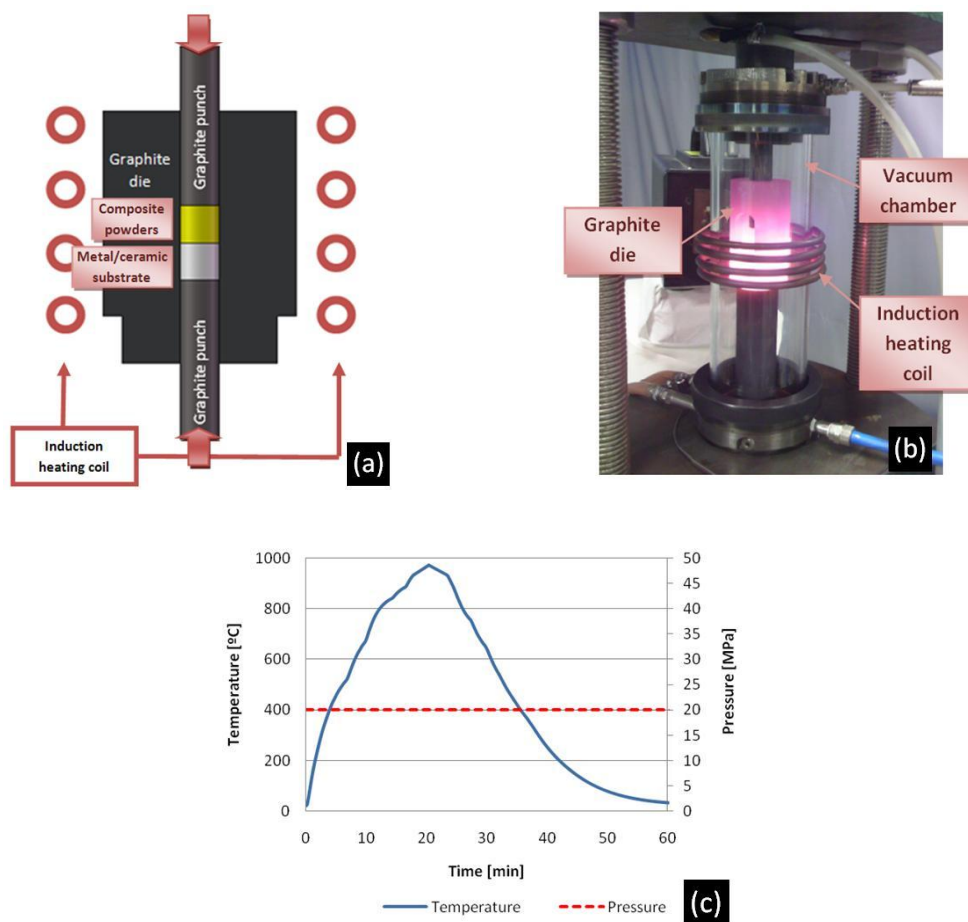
Hot pressing apparatus. (a) Hot pressing schematic (b) Processing a specimen in the vacuum chamber (c) Hot pressing cycle.
